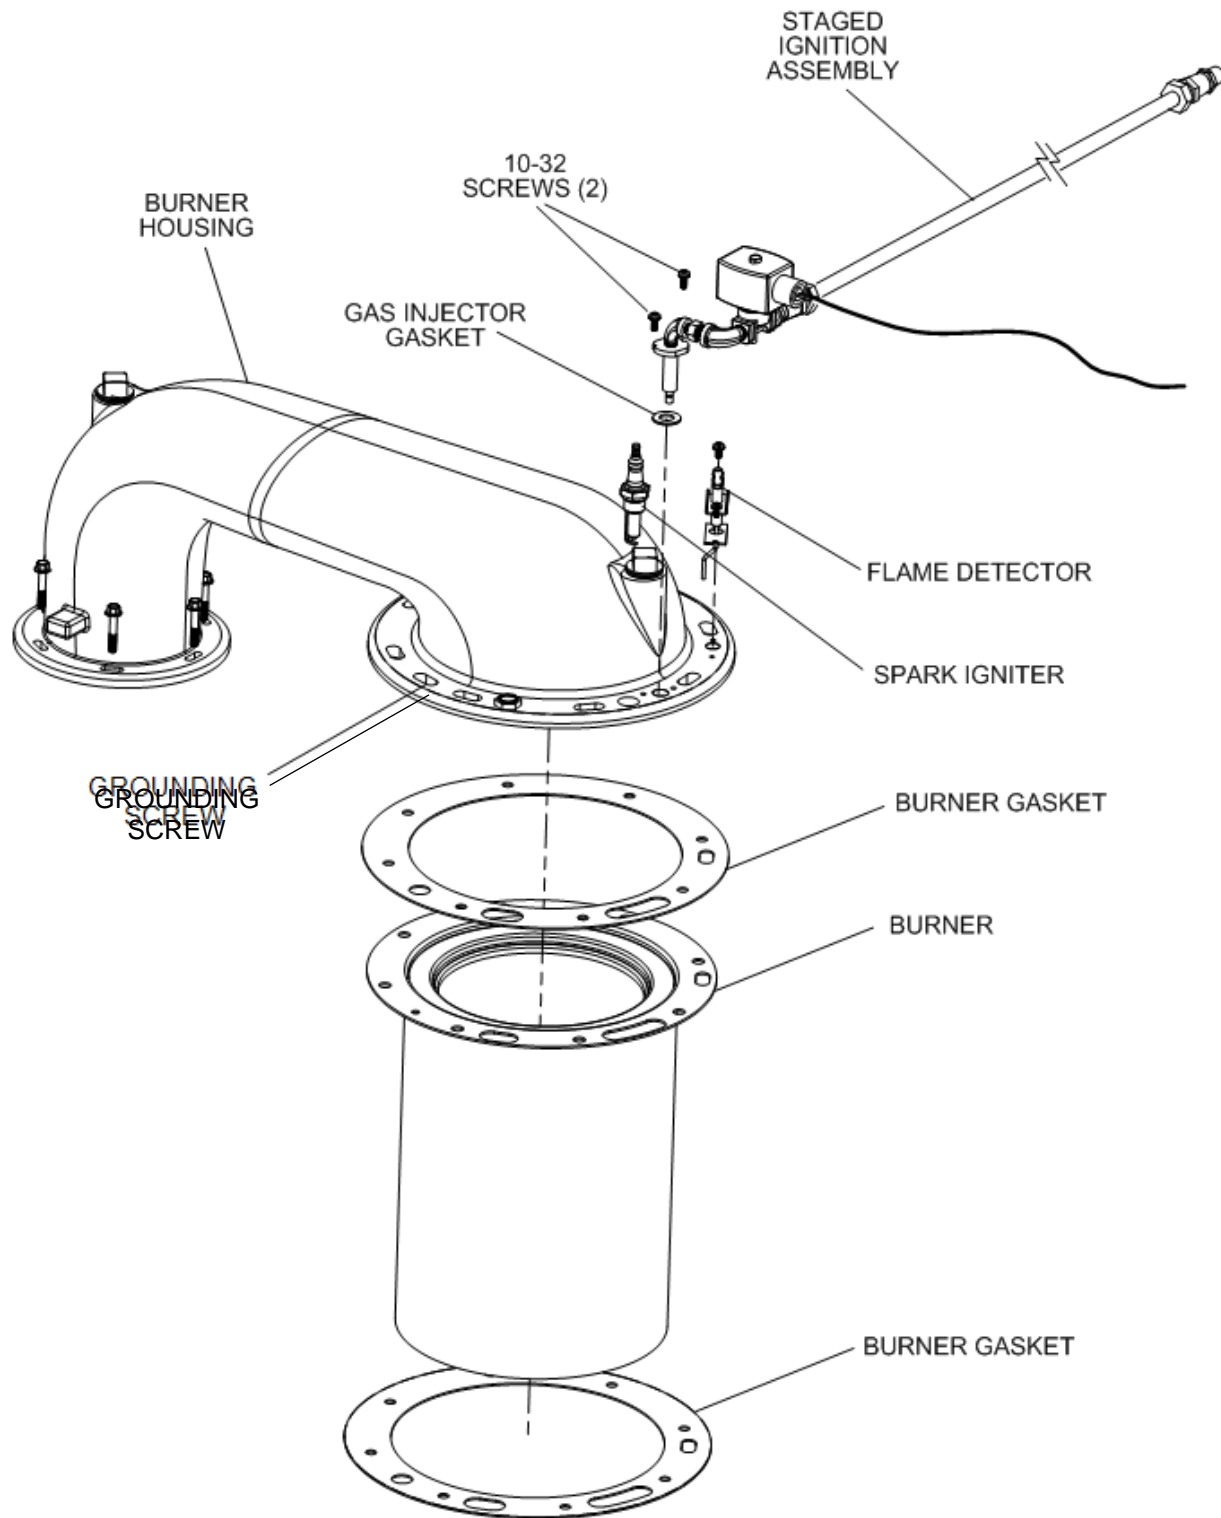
BMK2.0LN (Venturi Design) Burner Assembly - Exploded View
